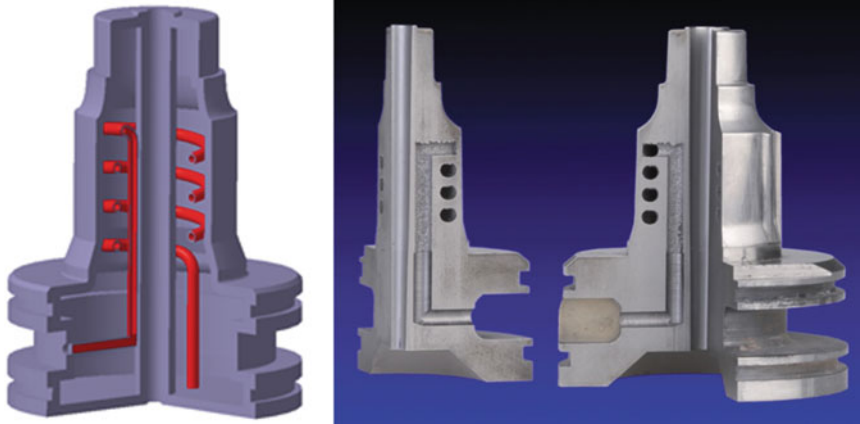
Left: scheme of a mold insert with conformal cooling channels, right: LPBF manufactured mold insert after post processing
